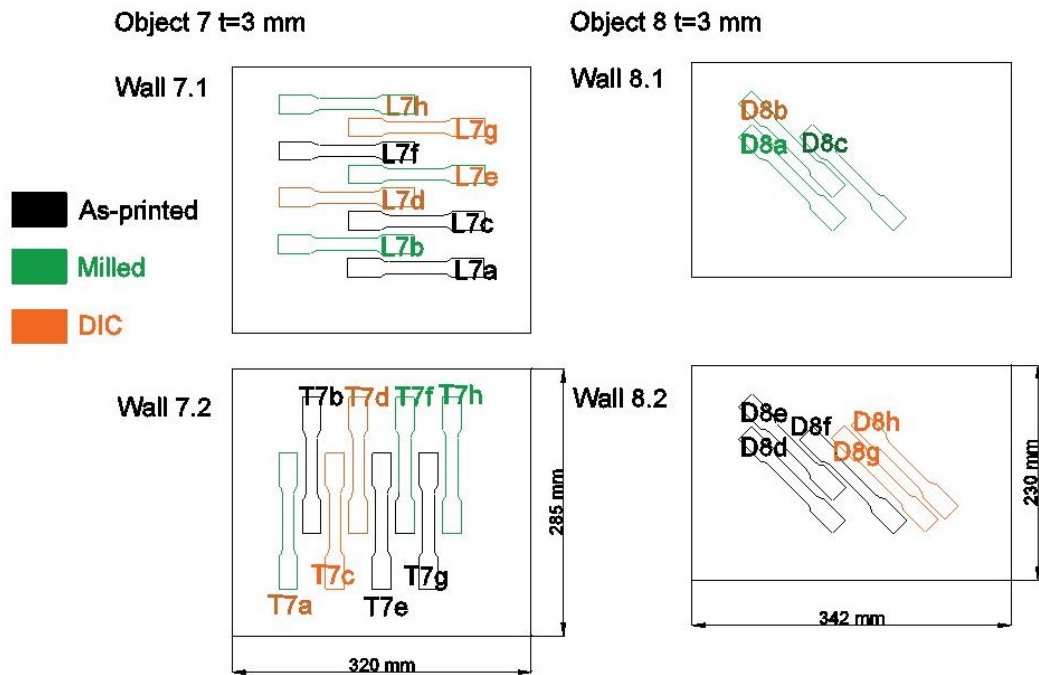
Tensile thin specimens (printing direction horizontally)
